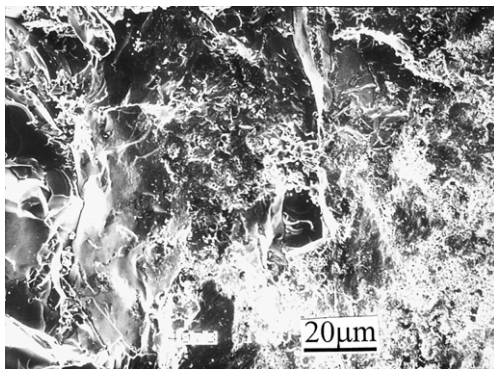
Fracture surface of the laser clad composite coating with NiCr-80%Cr₃C₂ precursor mixed powders showing the cleavage and river shape pattern.
